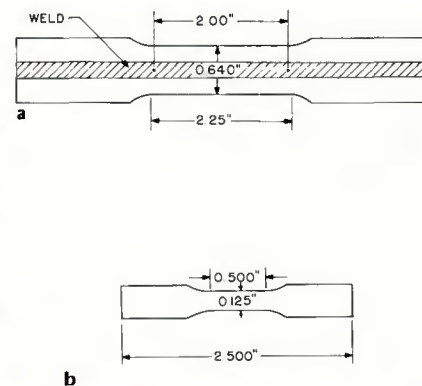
Specimens used for tensile testing. (a) Full-size specimen for welded samples. (b) Miniature specimen for fusion-zone and synthetic heat-affected zone tests
